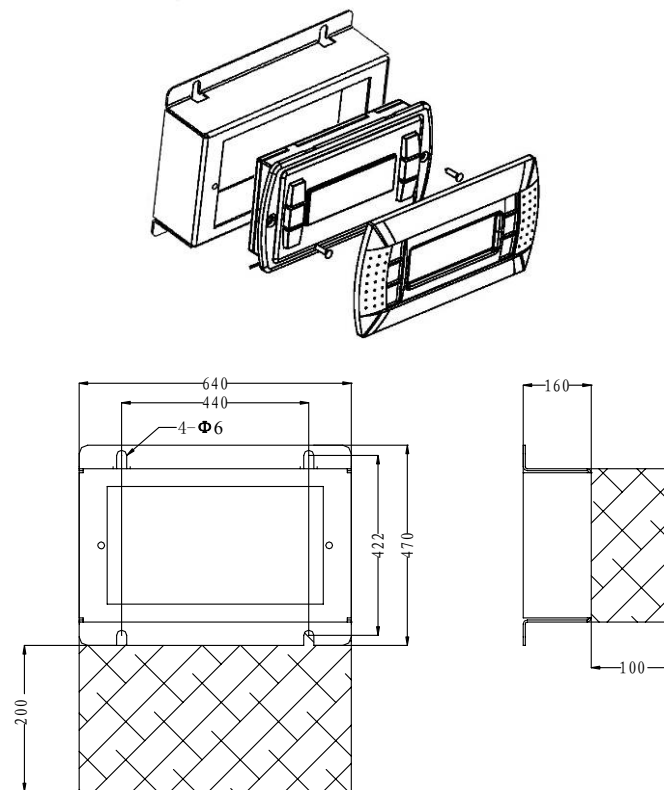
Dimension of remote control mounting bracket (unit: mm)
